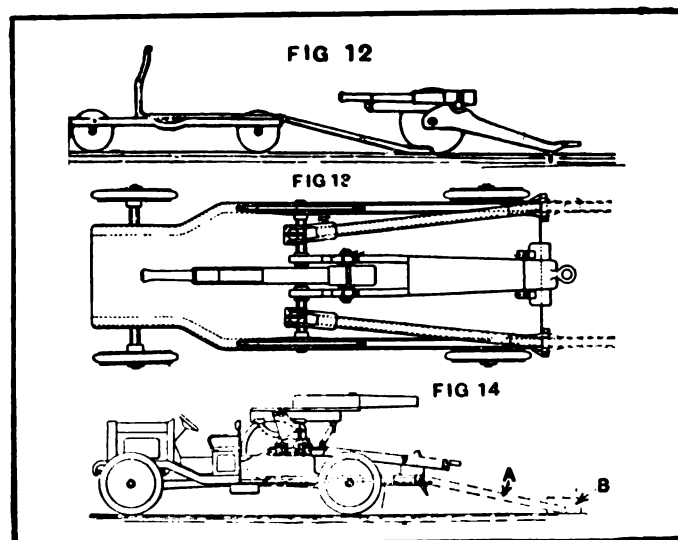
Krupp Motor Gun Carriage with Gun Removed; Fig. 13—Plan of Modified Krupp Motor Gun Carriage, Where the Ramps Are Made to Grip the Carriage Axle; Fig. 14—Krupp Motor Gun Platform: A, Showing Ramps Used When Removing the Gun; B, the Spade Used to Anchor the Gun When Employed in the Field.
